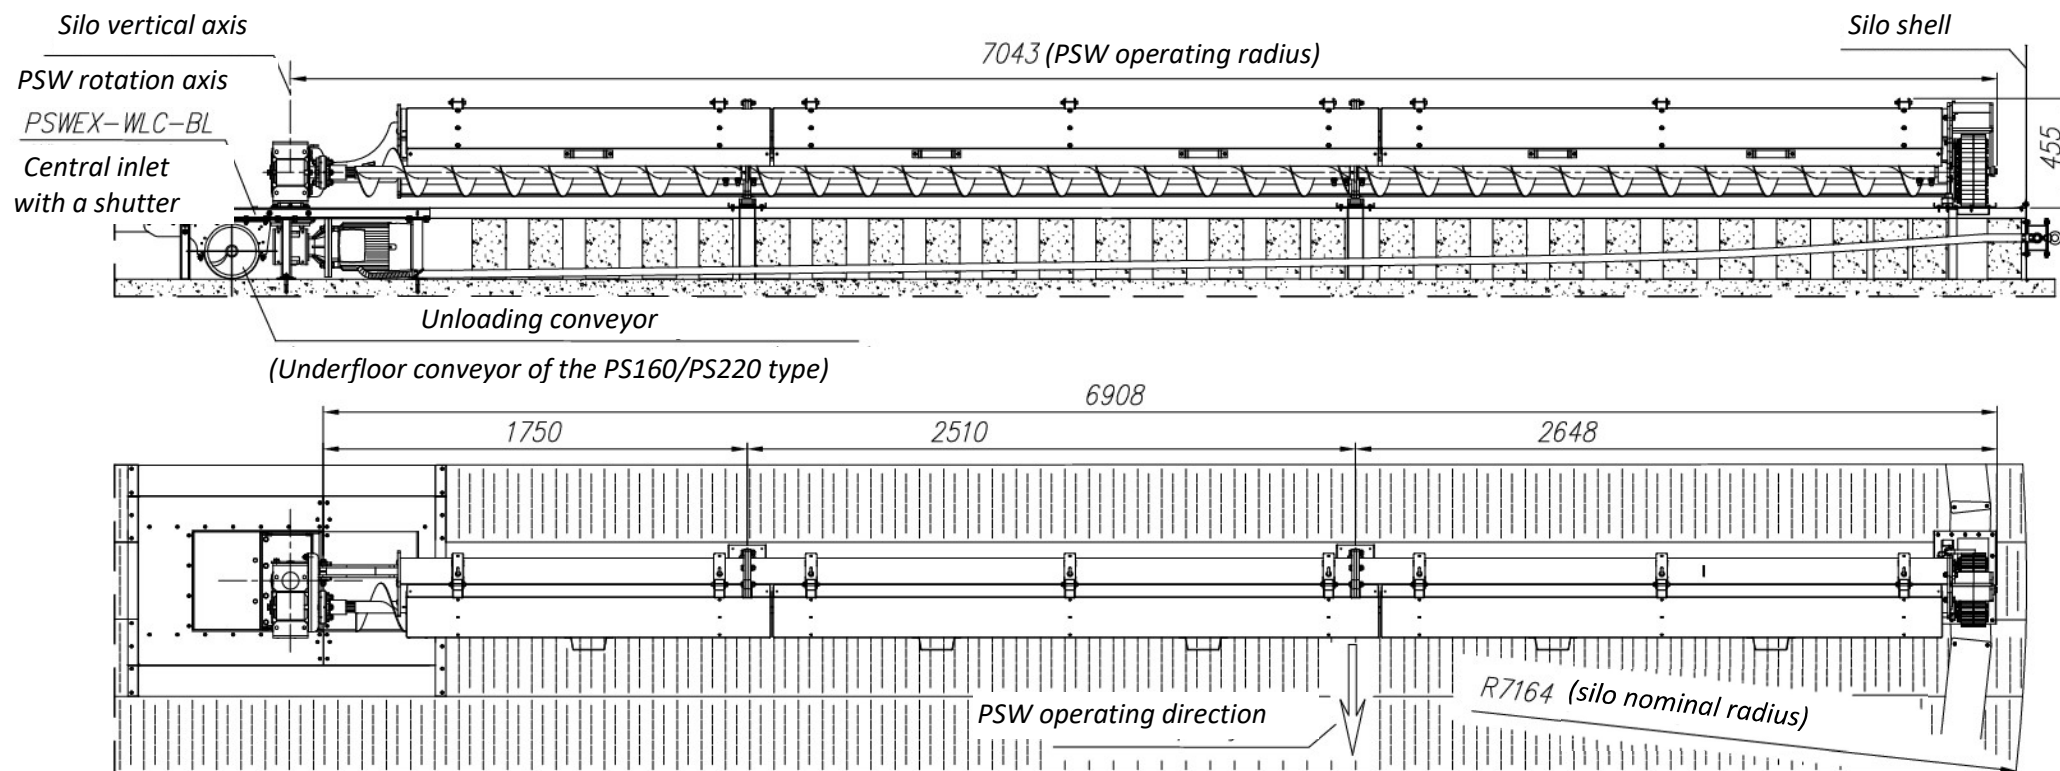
Basic installation dimensions of the internal screw conveyor, of the PSWEX-14 type (dimensions as mm).
